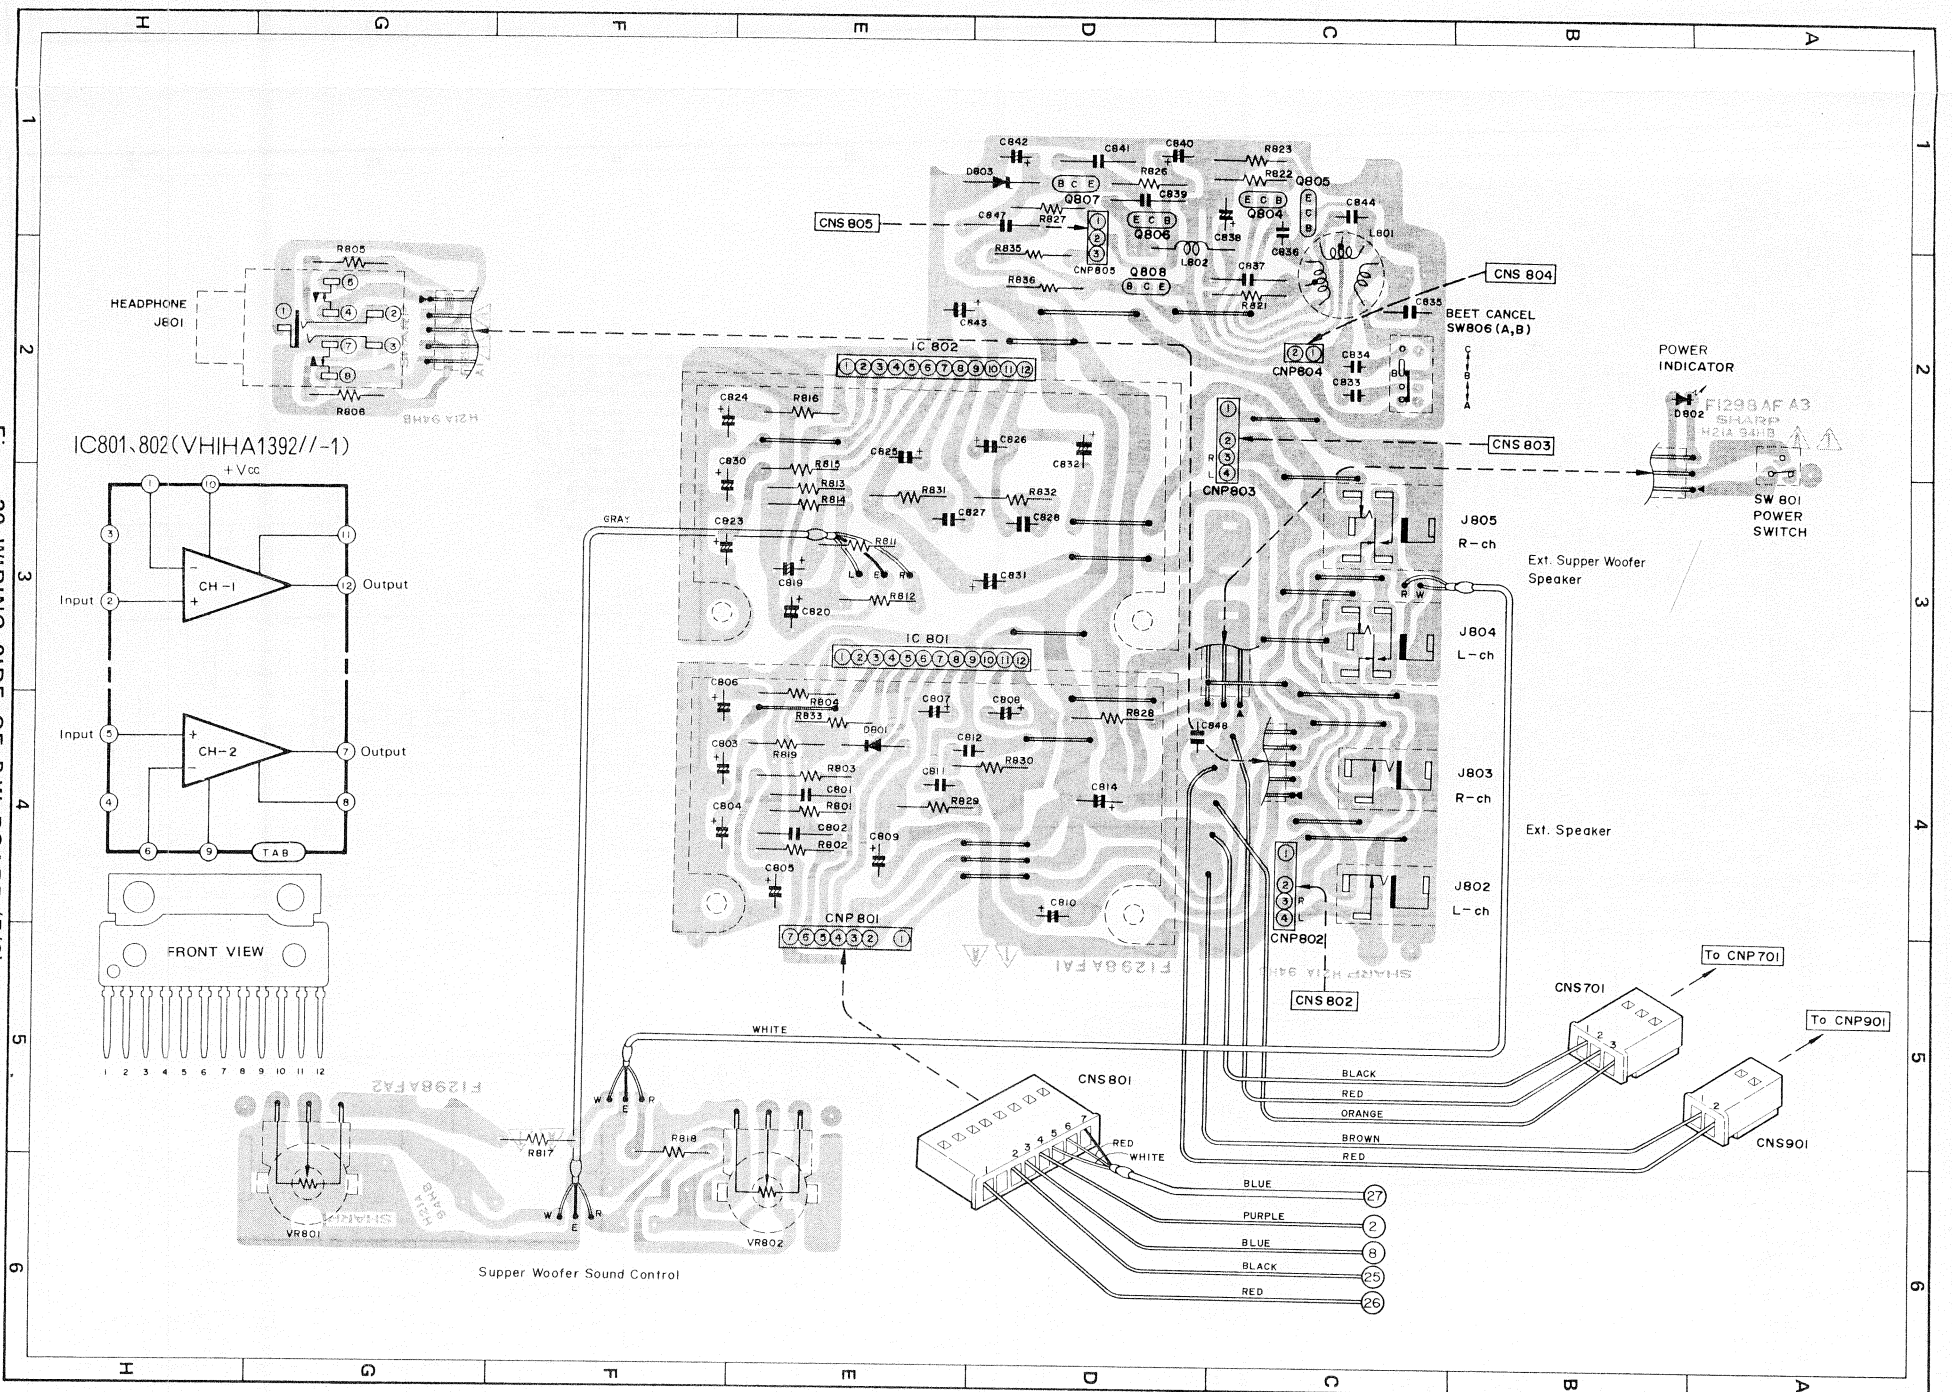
WIRING SIDE OF P.W. BOARD (5/6)
